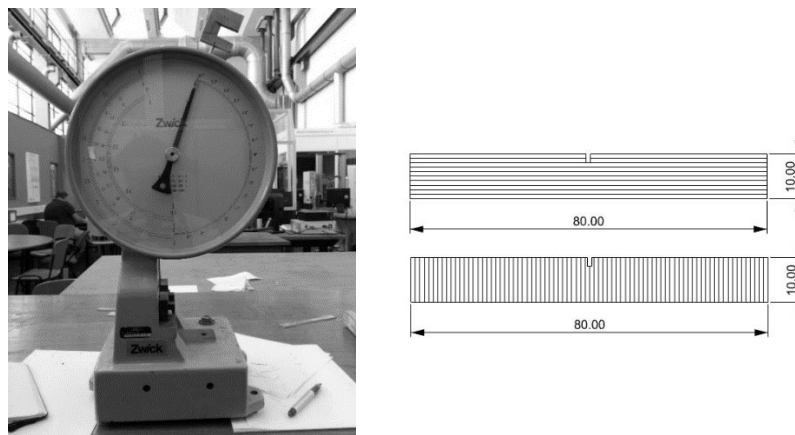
Test setup of the Charpy impact strength test: Device (left), sample dimensions (right).
